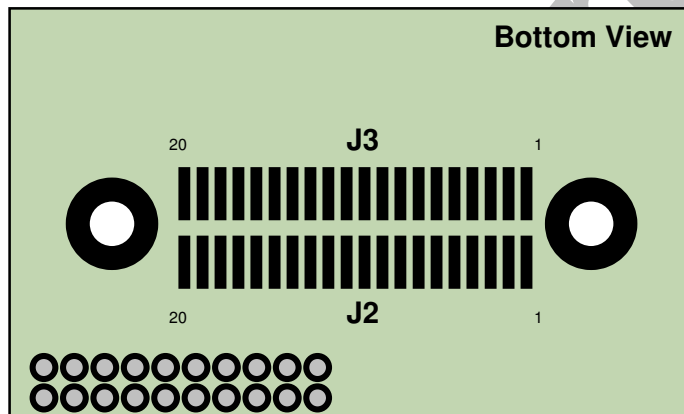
Bottom view of the PCB with the pinning of the J2 and J3 pads connector.
